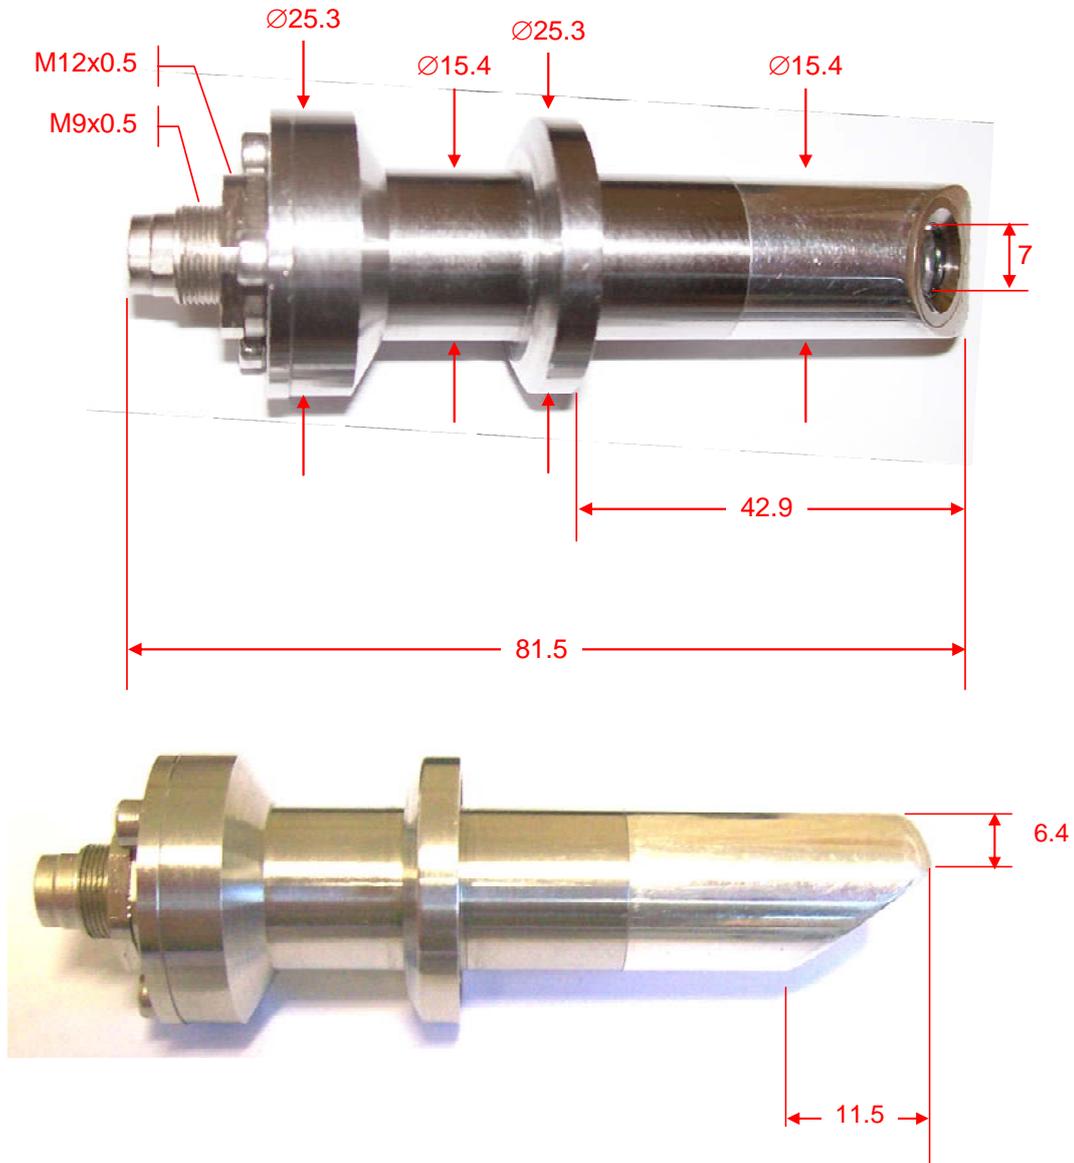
Dimensioned photo of sensor serial number 0. Dimensions in mm.
